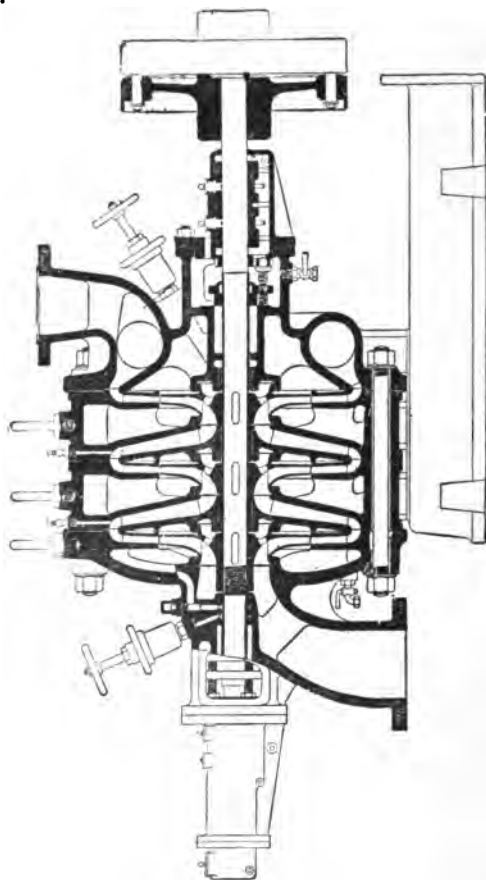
Section of a Worthington Multi-Stage Turbine Pump.
